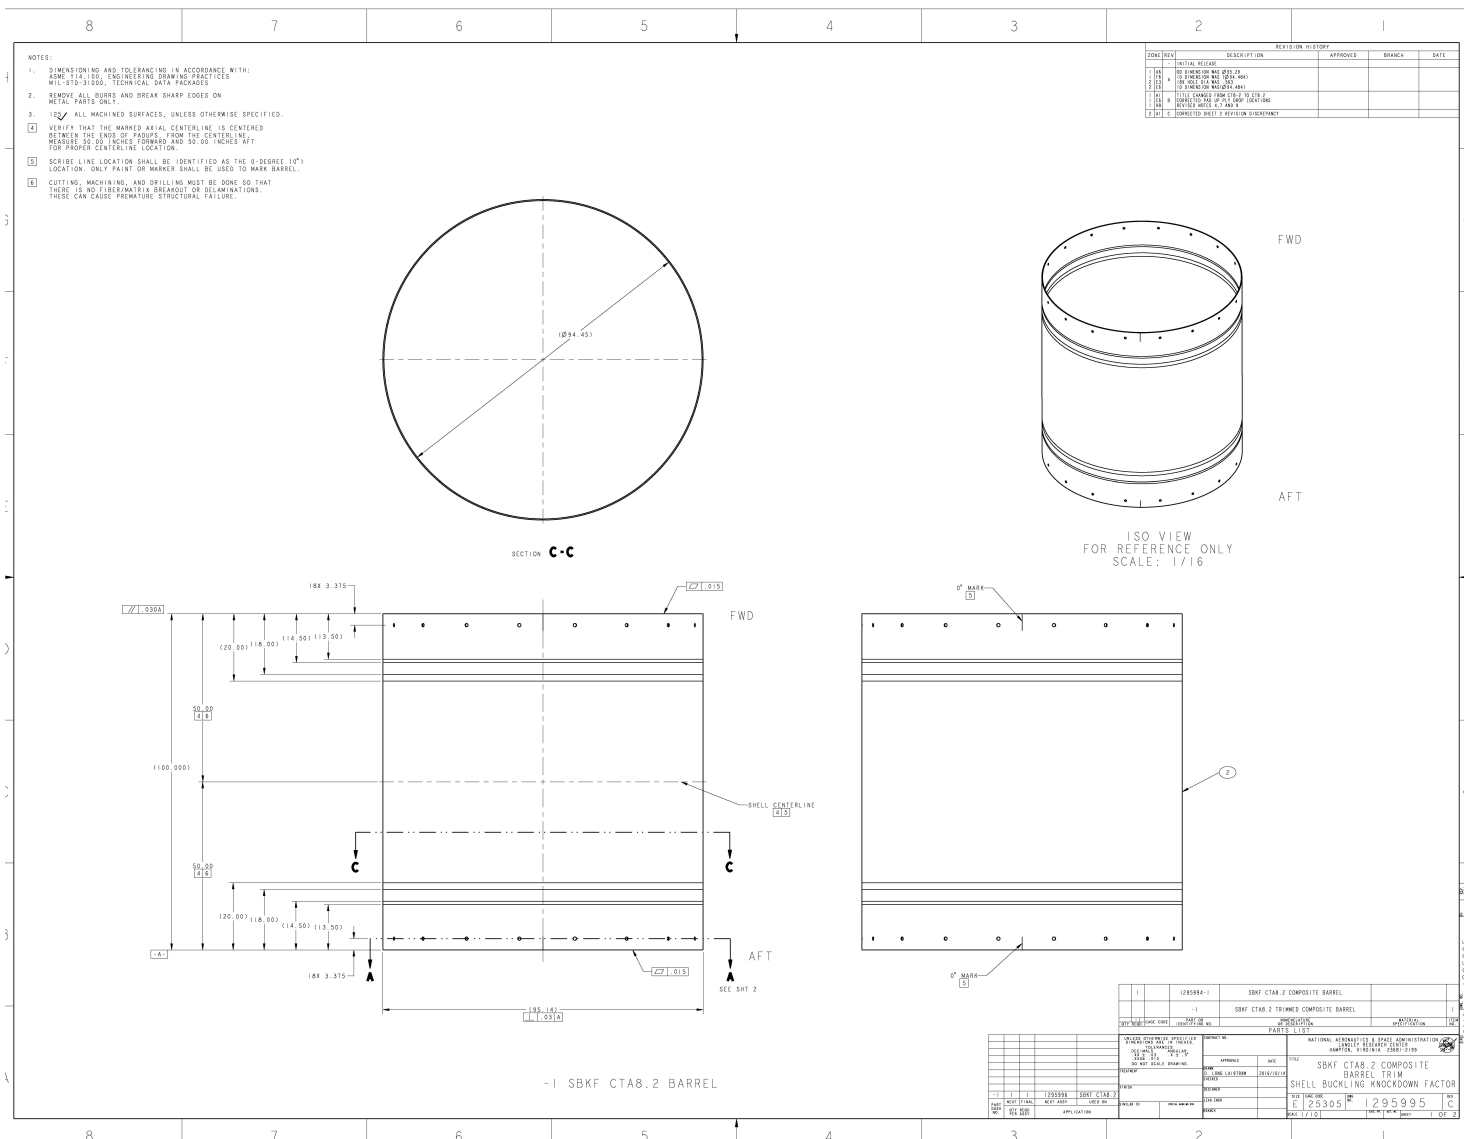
CTA8.2 Trimmed Composite Cylinder, LaRC Drawing 1295995 Rev. C.
